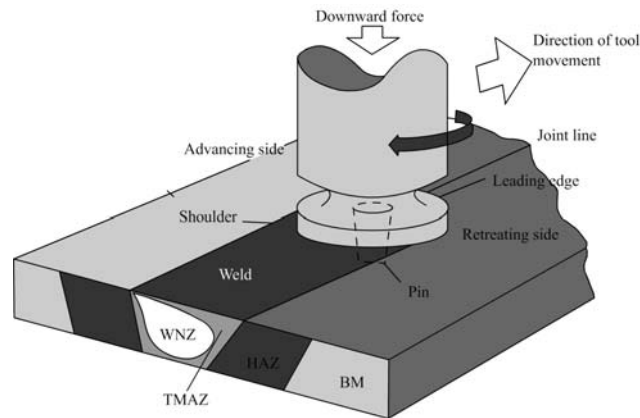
Schematic of friction stir welding showing different parts of tool and zones of weld joints (Steve Hensley, Modern Machine Shop, 2008)
